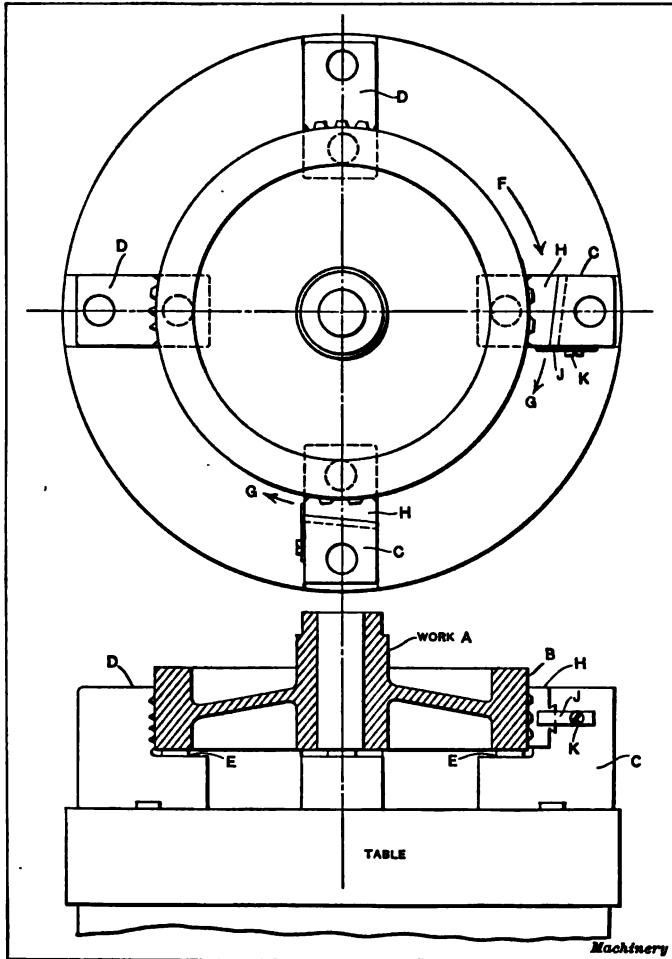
Chuck for a Boring Mill having Special Secondary Jaws
